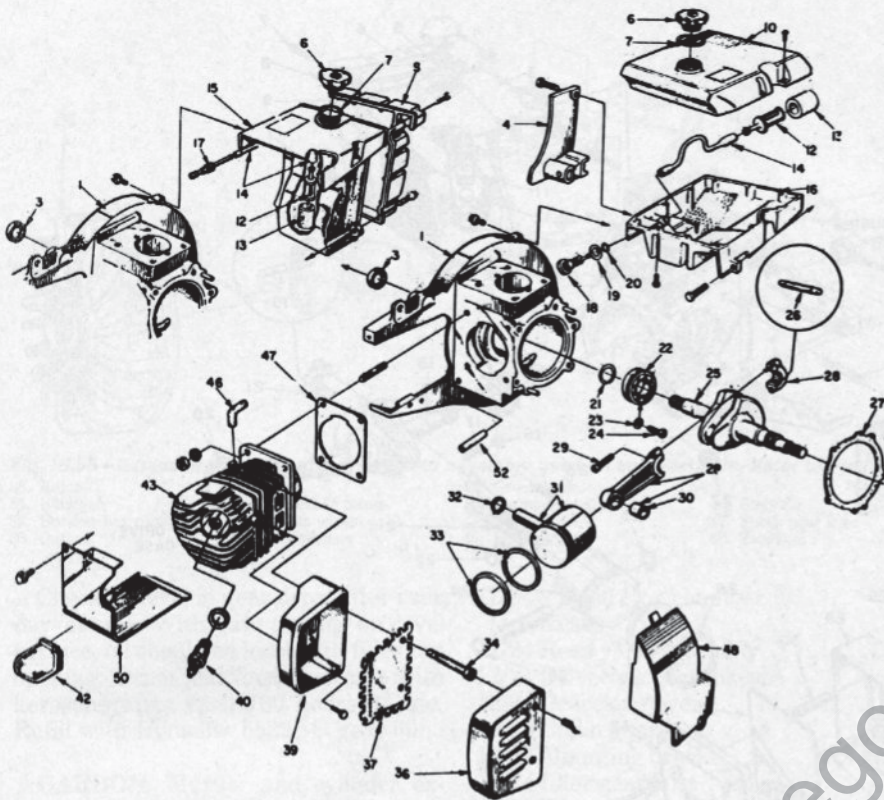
Exploded view showing Model S1050 Auto and Model S1130G engine assembly. View shows fuel tank construction for both the direct and gear drive models.
